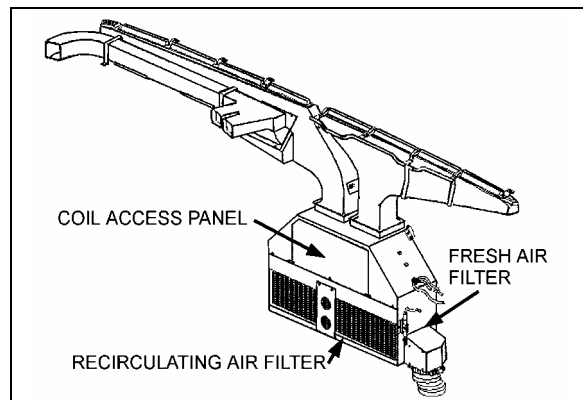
DRIVER'S HVAC UNIT COIL ACCESS PANEL
